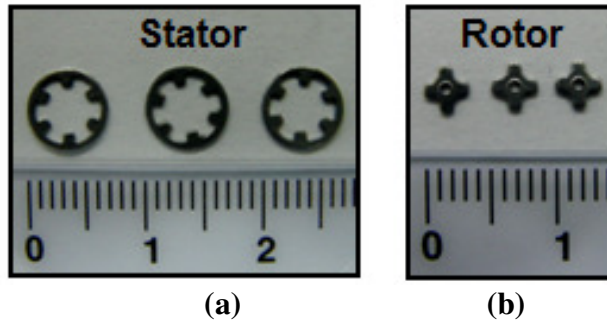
Rotor and stator strips obtained from the die cutting process – (a) Stator – (b) Rotor. Scale in centimeters.
